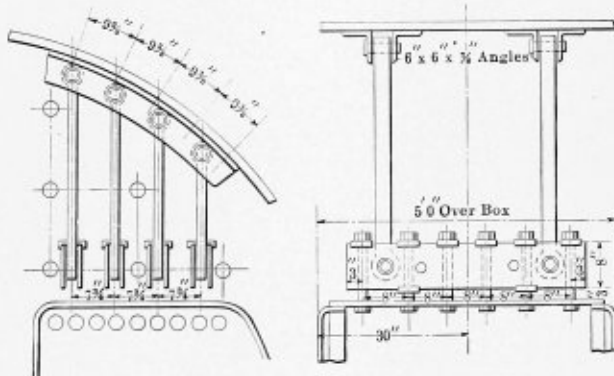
DOUBLE HANGING GIRDER STAYS
